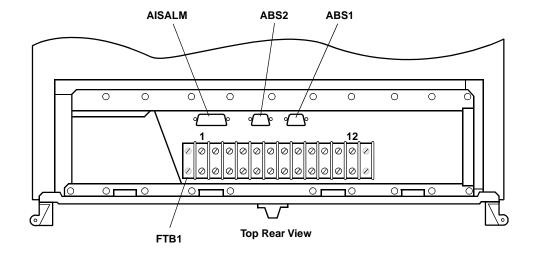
NTRX25AJ Power Filter Kit Assembly
